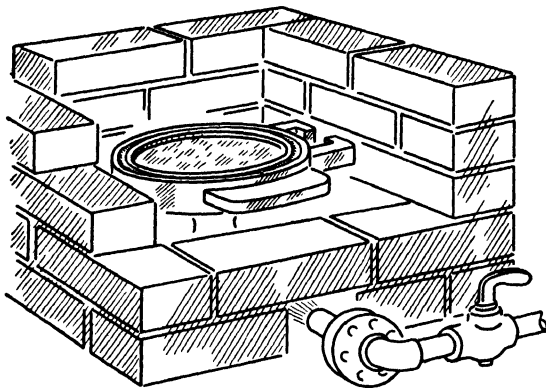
Build a preheating and cooling furnace to fit the part.
